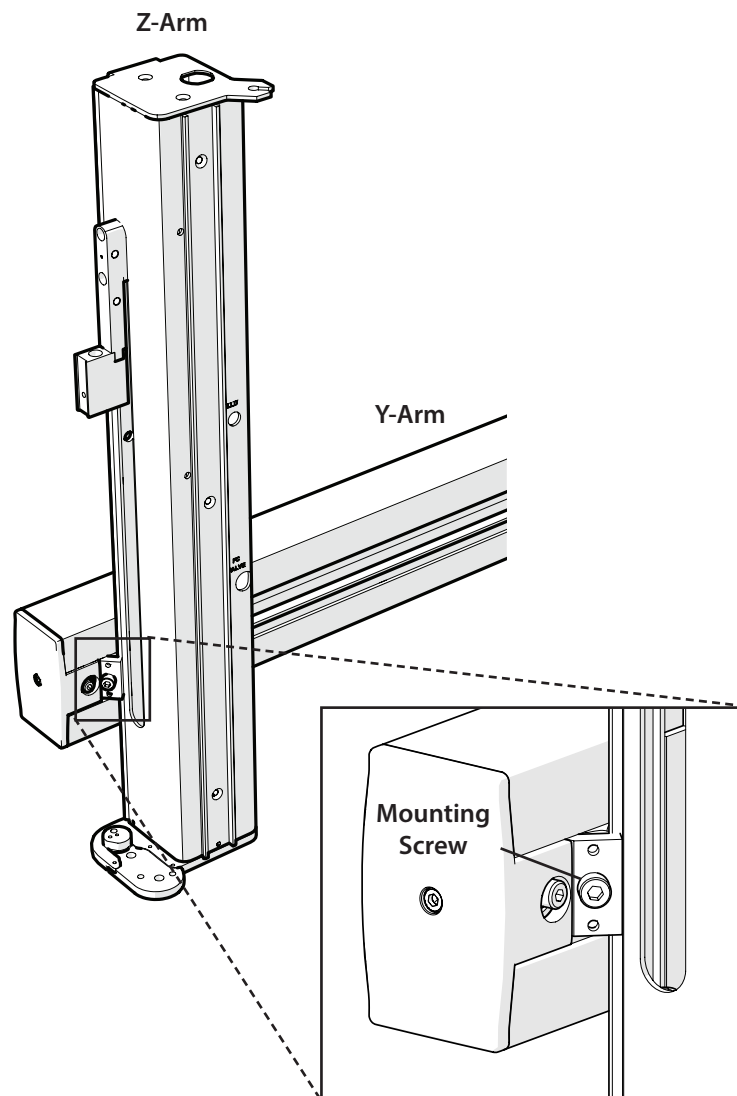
Z-Arm Mounted on GX-271 Liquid Handler
